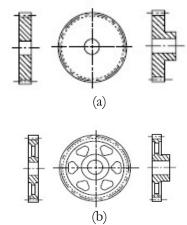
(a) Plain Spur Gear and (b) Spoked Spur Gear (bostongear.com)
